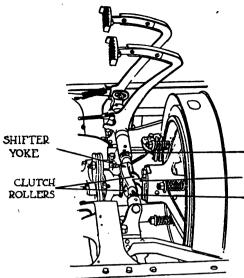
The clutch rollers must bear uniformly on the clutch spacer shaft when the pedal is depressed and they should not touch when it is released
